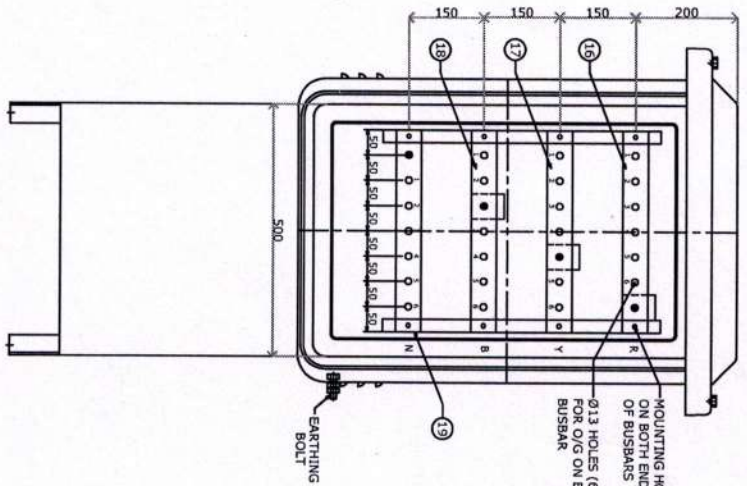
DETAILS OF I/C-O/G CABLE ENTRY-EXIT HOLE ARRANGEMENT
